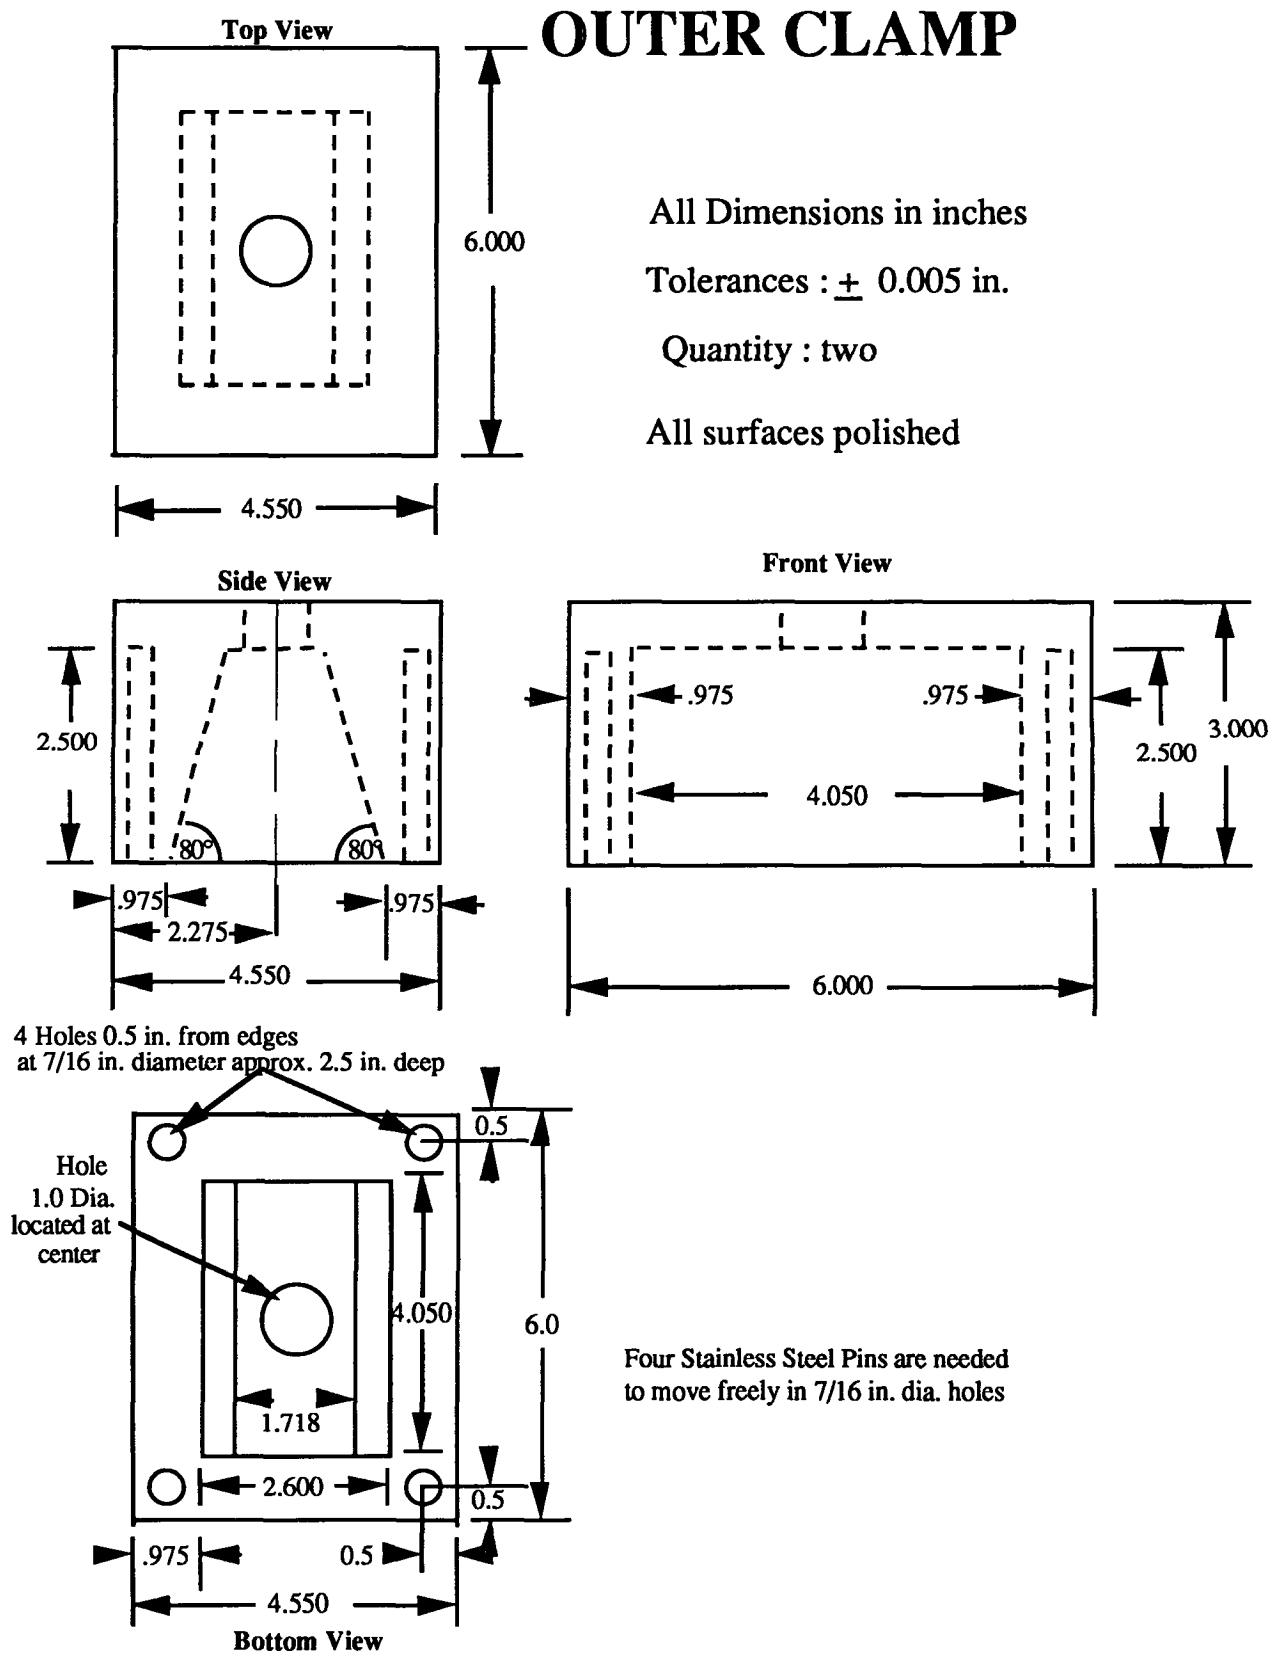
Detailed Drawing of Outer Clamp Piece
